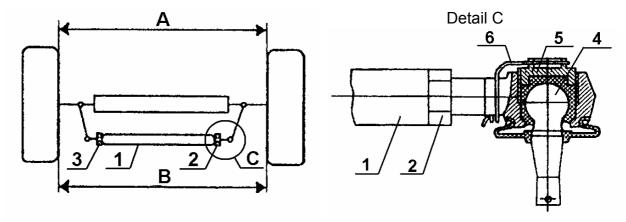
Adjustment of front wheels toe-in 1- steering rod; 2,3- counter-nuts (2 szt.); 4- ball joint.5 -stone, 6- securing wire A i B – measured values, "C" - detail – articulated joint + rod end
